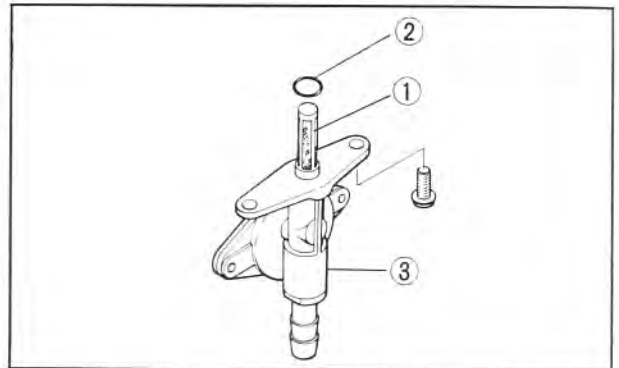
(1) Fuel filter (2) O-ring (3) Fuel valve
